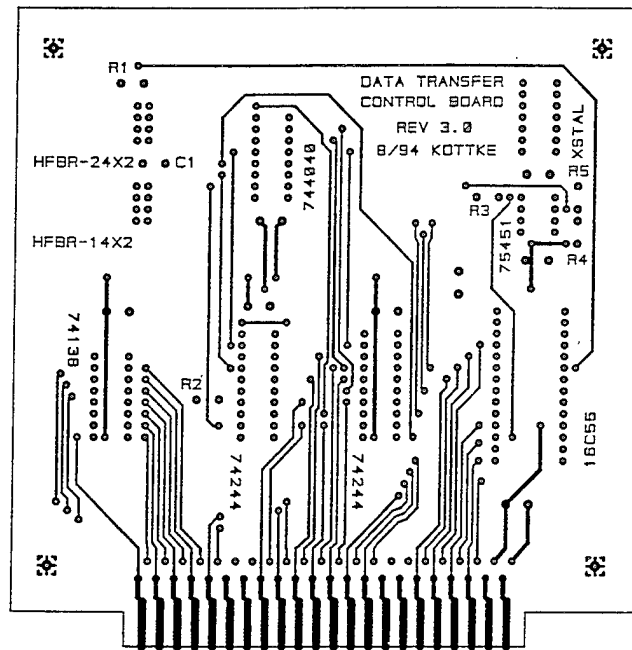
Artwork for the component side of the data transfer control board printed circuit board.
